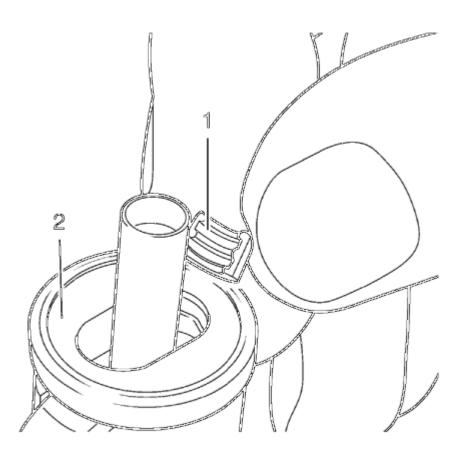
Valve Key Installation Mounting Piece Components Courtesy of GENERAL MOTORS COMPANY
